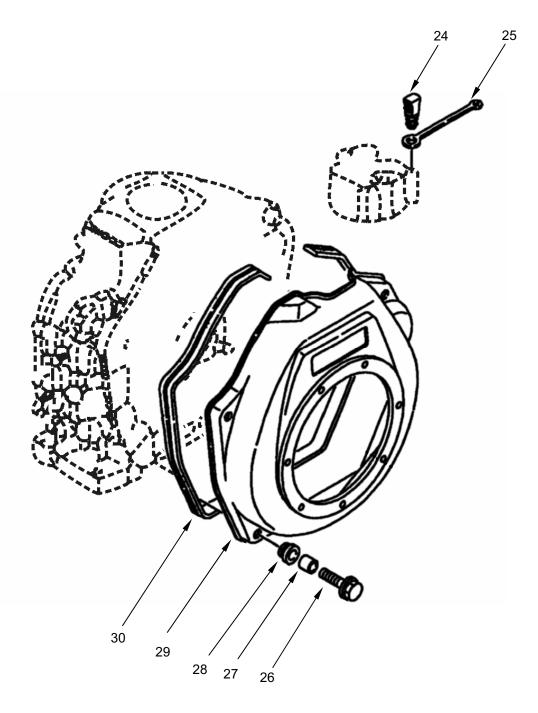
Engine, Diesel (Sheet 2 of 9) (Cooling and Starting Device).
